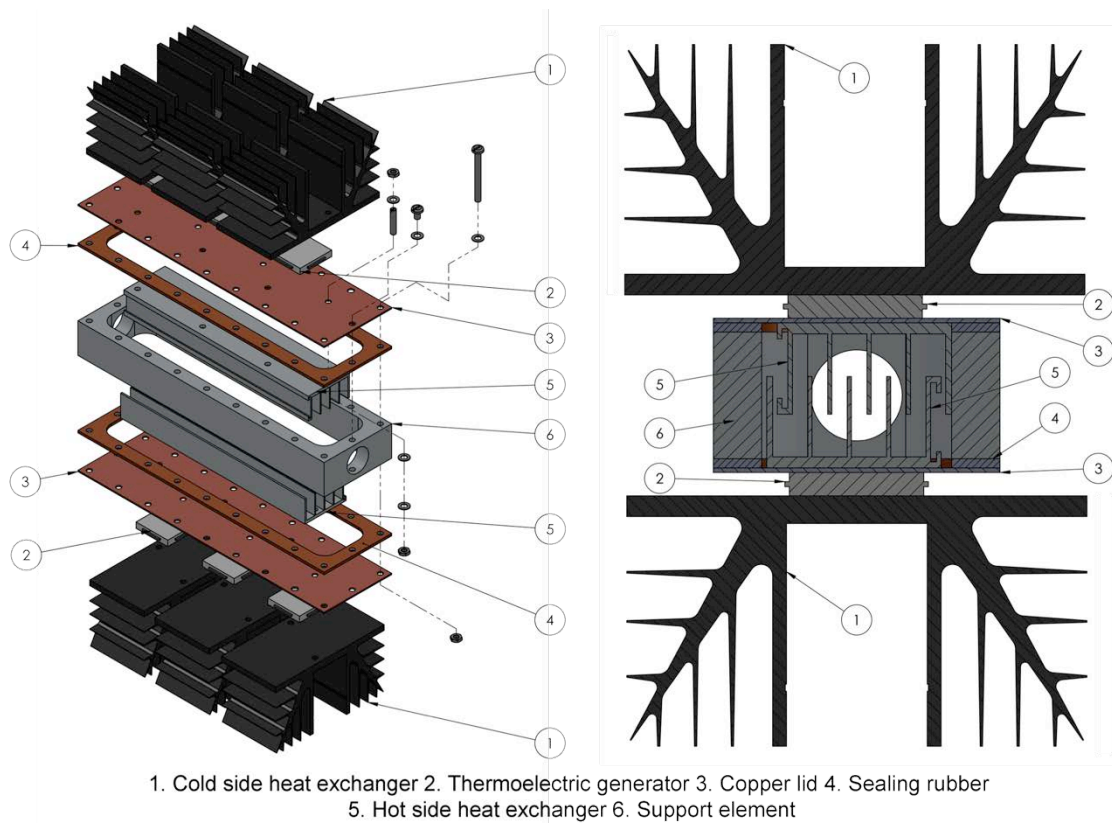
Exploded and cross sectional view of the experimental setup.
